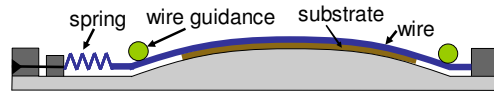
Springs and wire guides of the clamping tool force the wires onto the bended substrates. Accurate wire contact masks surface for layer patterning.
